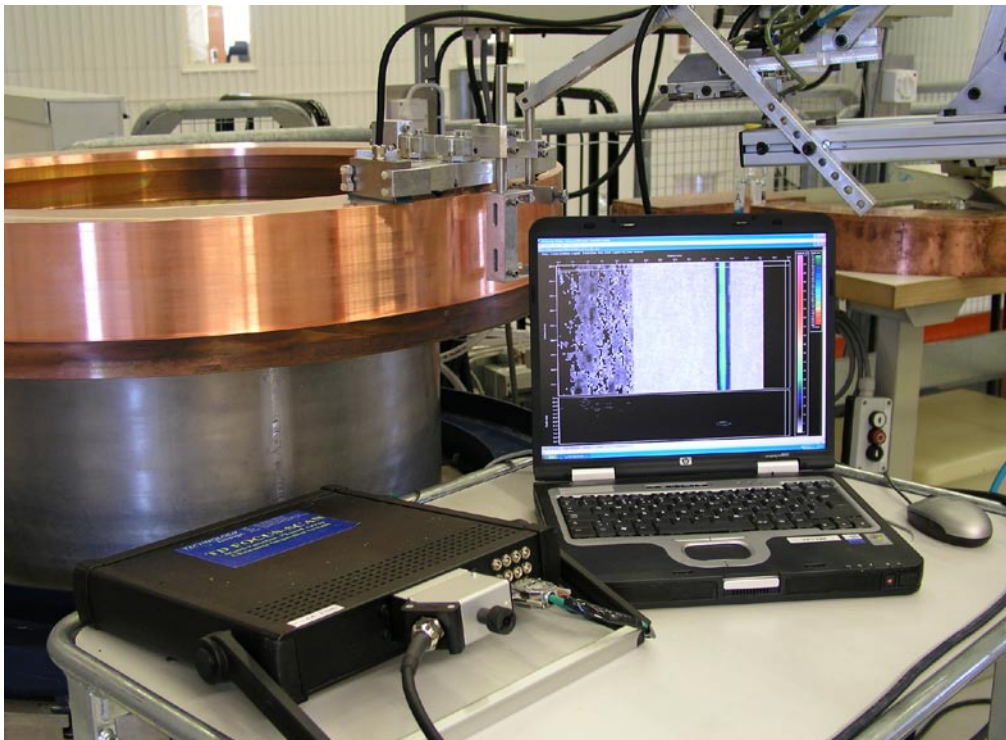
Phased array system used for the inspection of the FSW at the Canister Laboratory.
